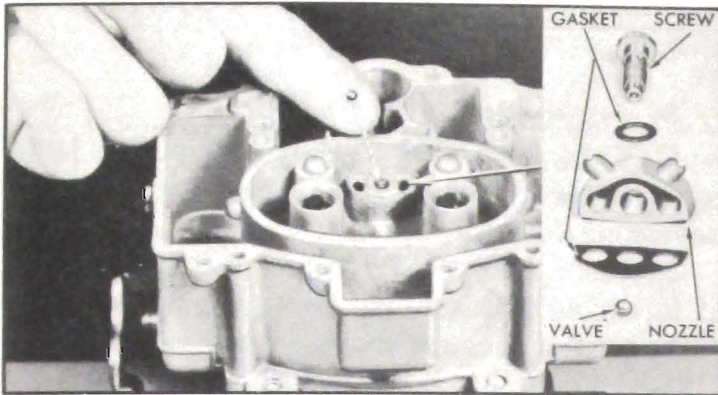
Installing Check Valve Ball and Pump Discharge Nozzle
